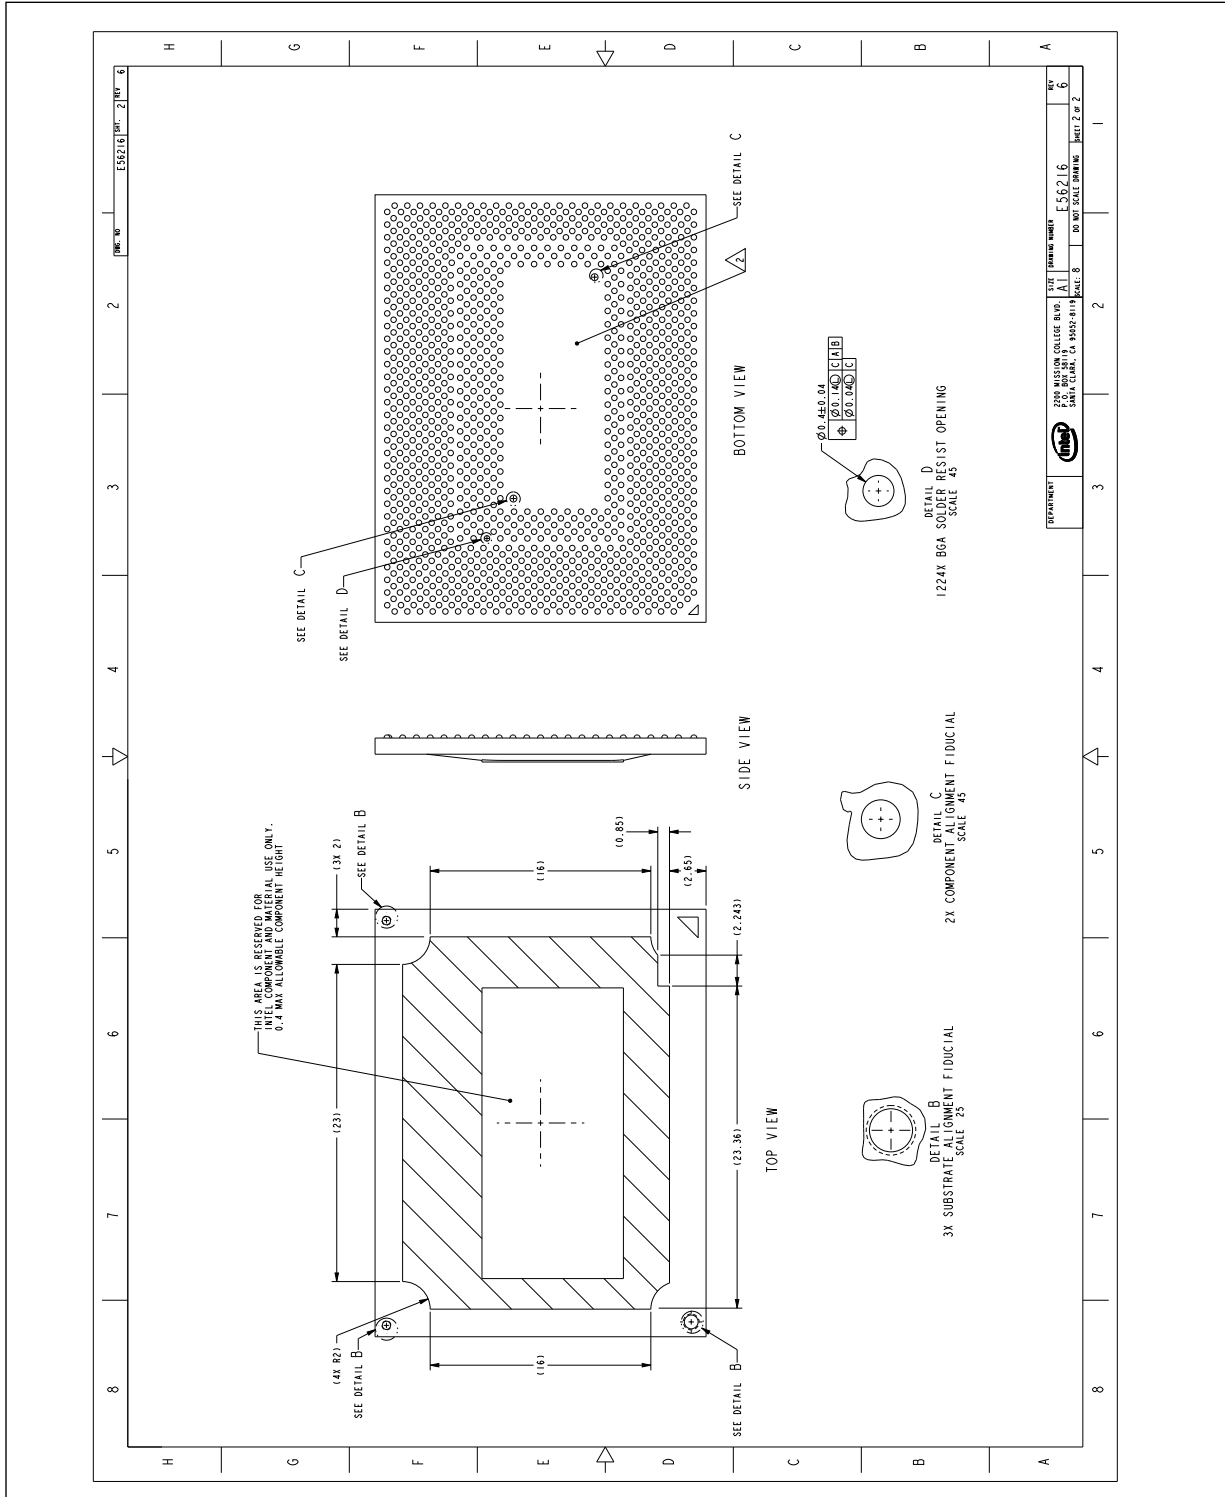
Processor BGA1224 4C (GT2) Mechanical Package (Sheet 2 of 2)
